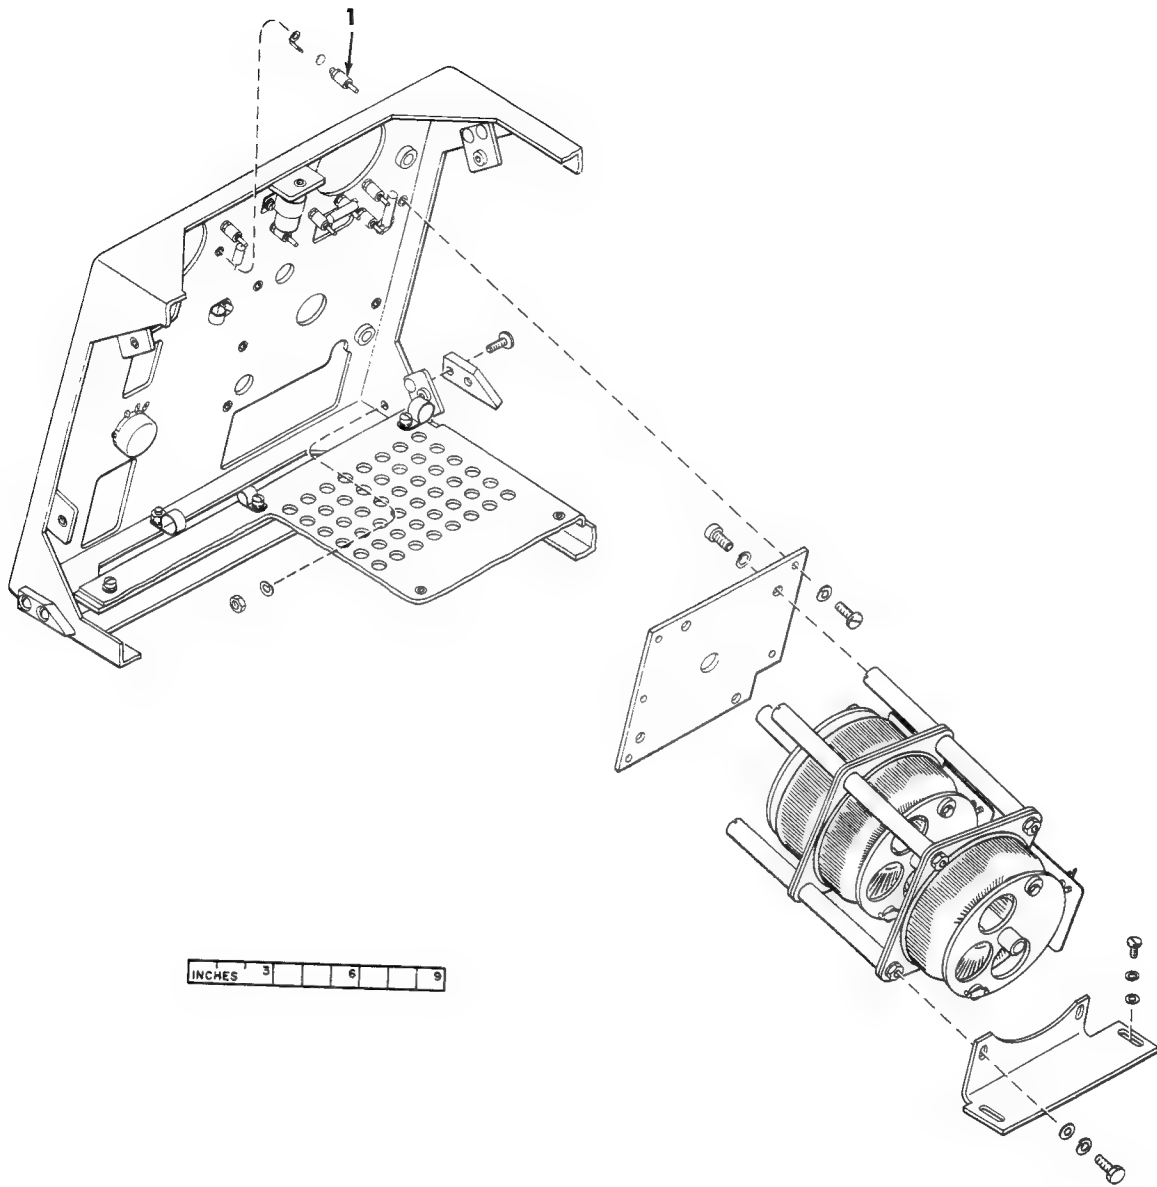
Control, antenna (7620500 and 7620662)—exploded view
